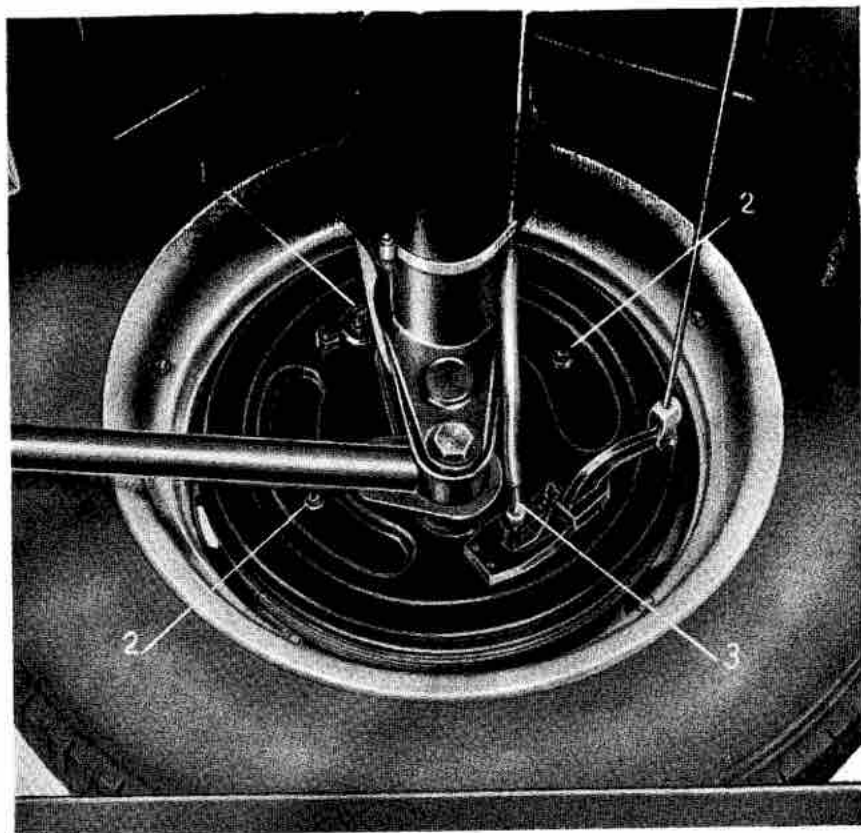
Adjustment of clearance between brake linings and drums for bleeding the rear wheel brake cylinders.
